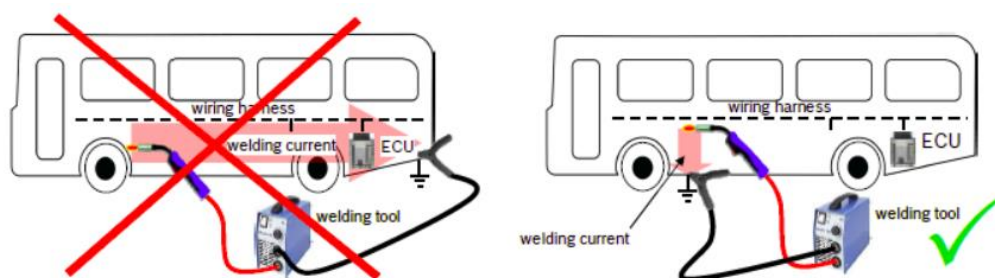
Proper Grounding of Welding Tools to avoid Electronics Damage
